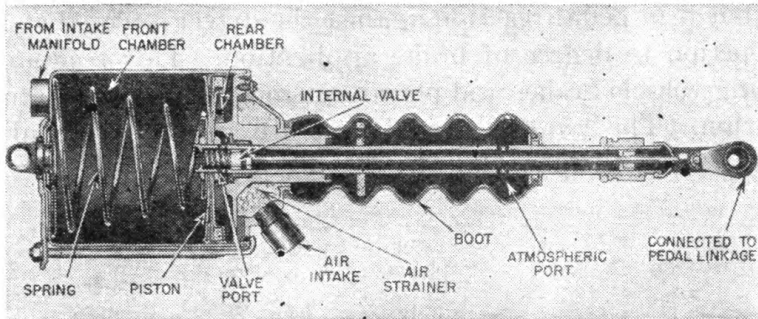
Sectional view of internal brake valve incorporated within power cylinder.
